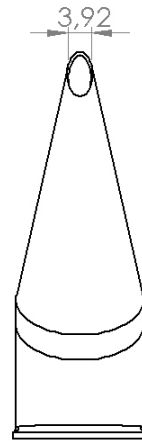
Front view drawing of the tip. Dimensions in micrometres [μm].
